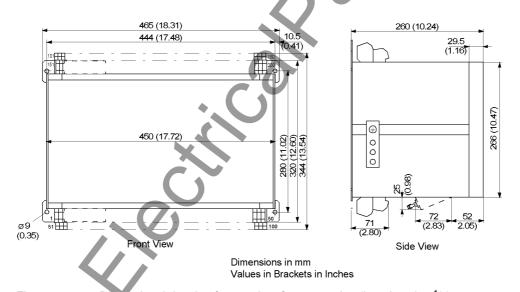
Dimensional drawing for panel surface mounting (housing size <sup>1</sup>/<sub>1</sub>)
